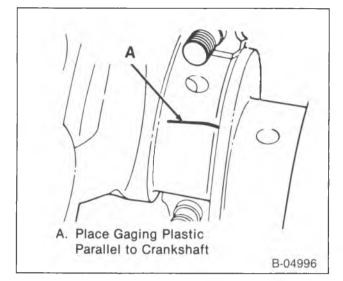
Placing the Gaging Plastic on the Connecting Rod Journal
